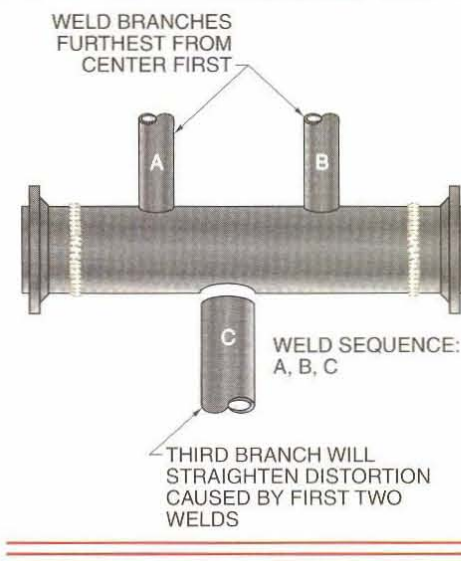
Balanced welding of branch welds reduces the tendency of pipe to distort.
